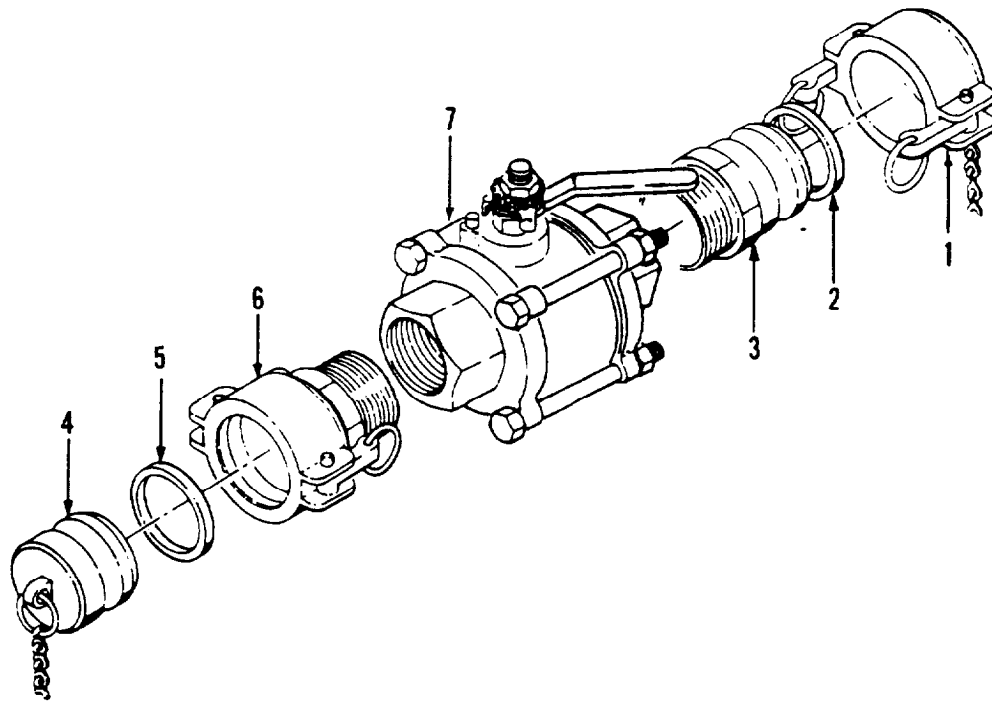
Ball Valve Assembly, 2.00 Inch, Quick Acting.
